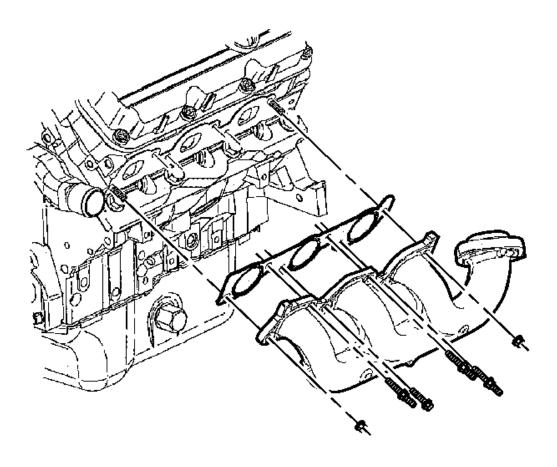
Identifying Left Exhaust Manifold Courtesy of GENERAL MOTORS CORP.
